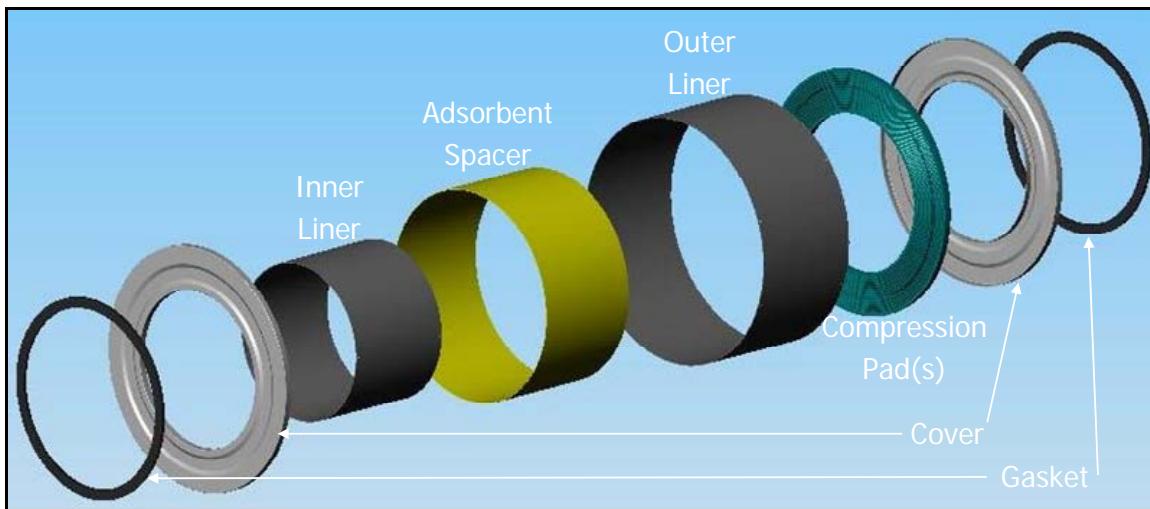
CBR/TIC Gas Filter Assembly Exploded View
